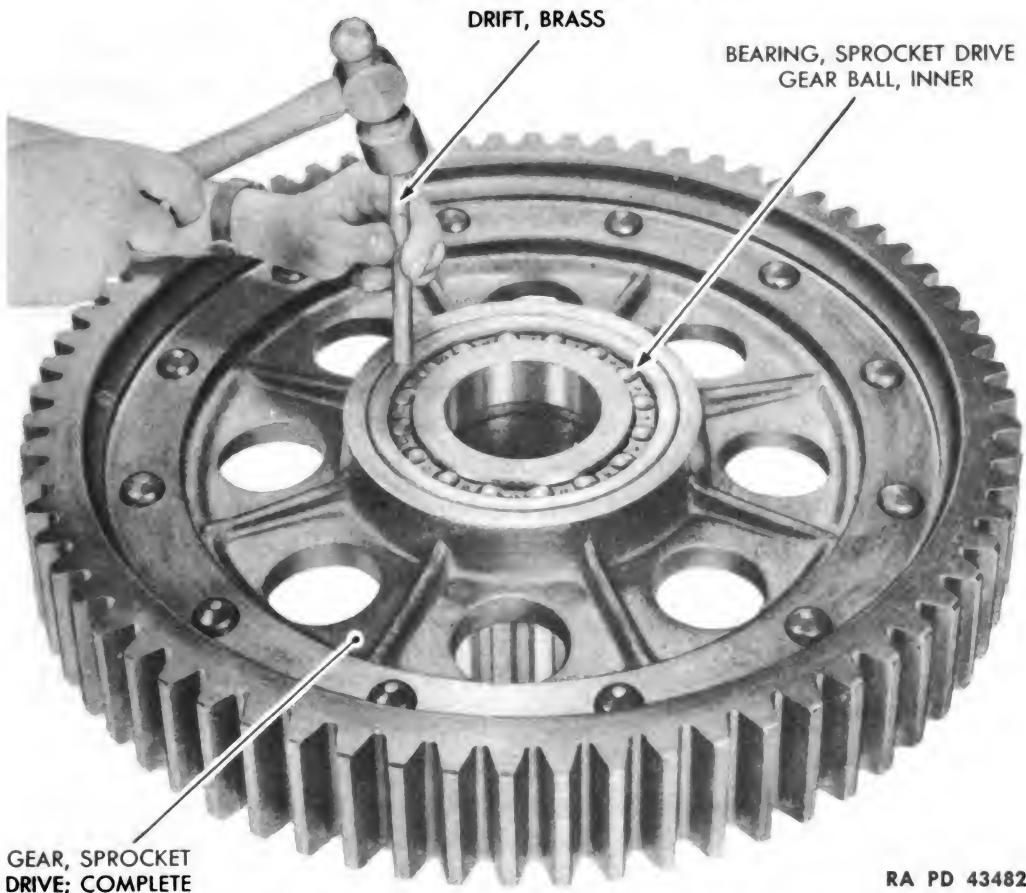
Bearing in Sprocket Drive Gear; Complete Installation
